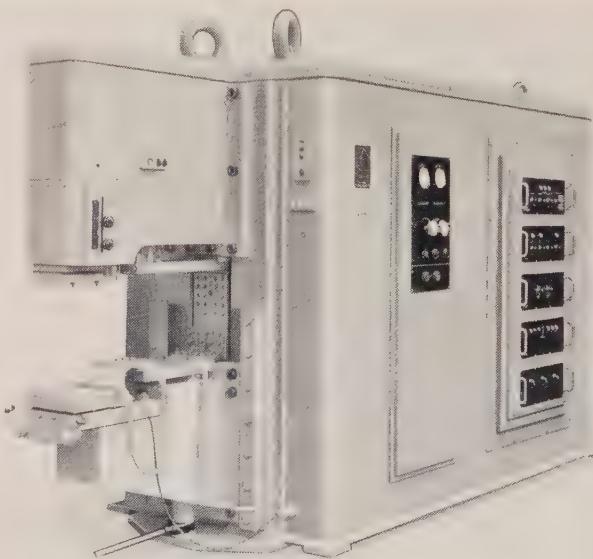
Three-phase projection welding machine (6 ton electrode pressure, 120 kA maximum welding current) with current and electrode pressure programme control
